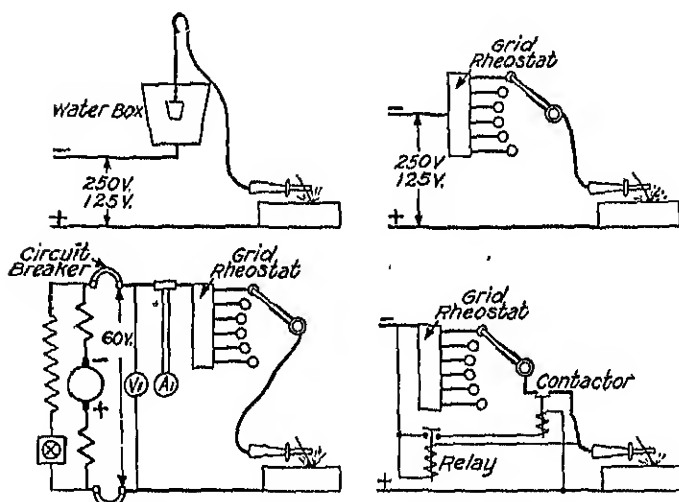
Arc Welding Circuits as First Used.
